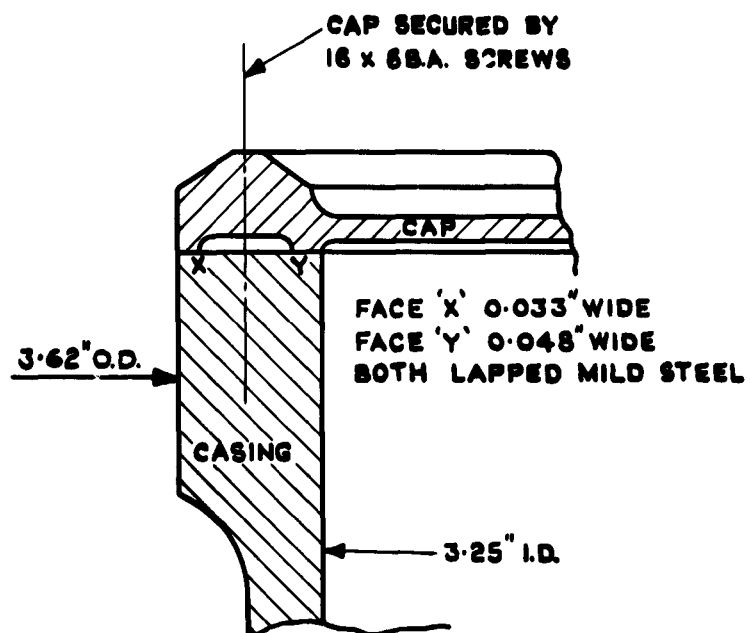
SECTION OF LAPPED BRIDGE SEAL.
